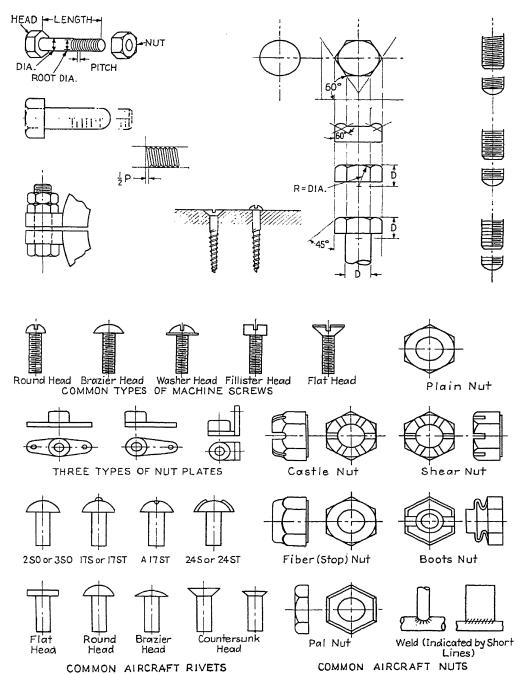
Sample threads, bolts, nuts, machine screws, and rivets.
